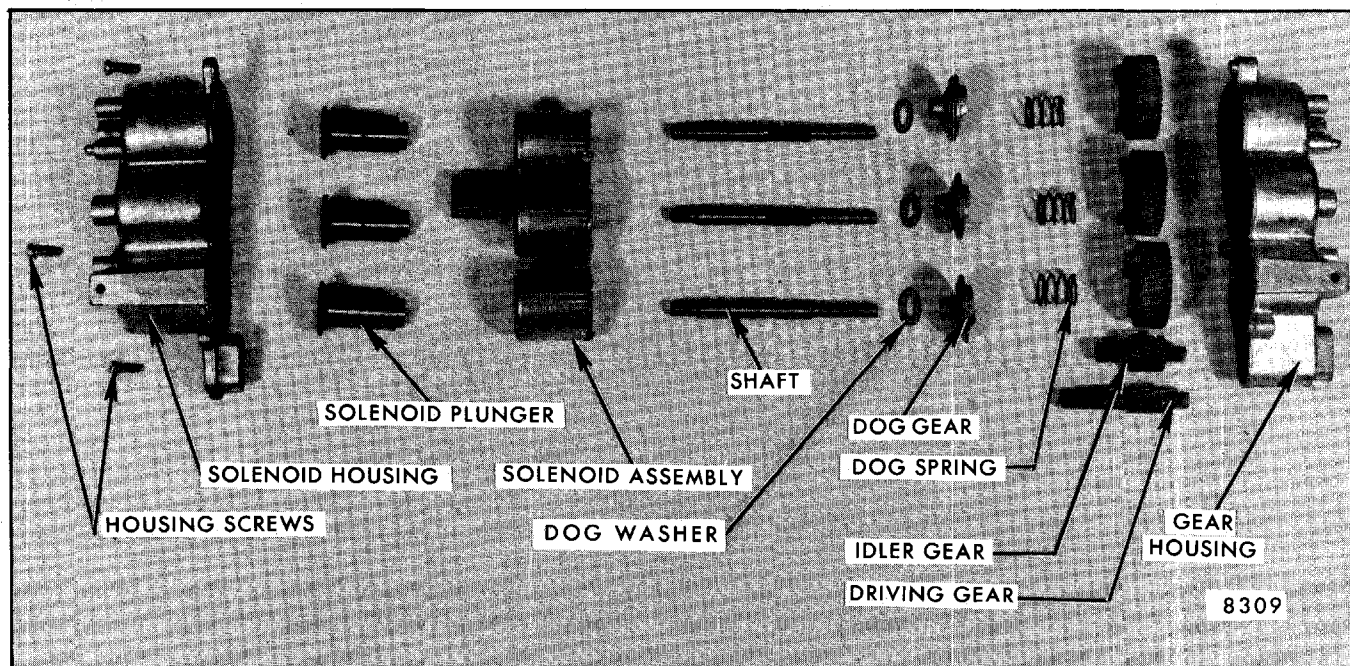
Six-Way Seat Adjuster Transmission Component Parts for 60-40, 50-50, 45-55 and Bucket Seats
